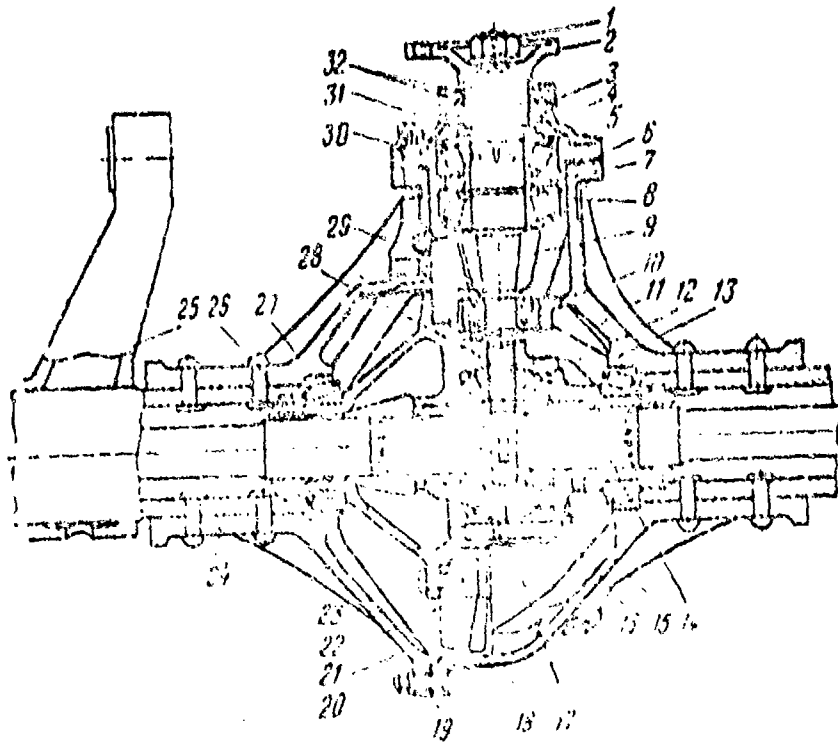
Rear drive axle assembly of the ZIL-157K motor vehicle:
